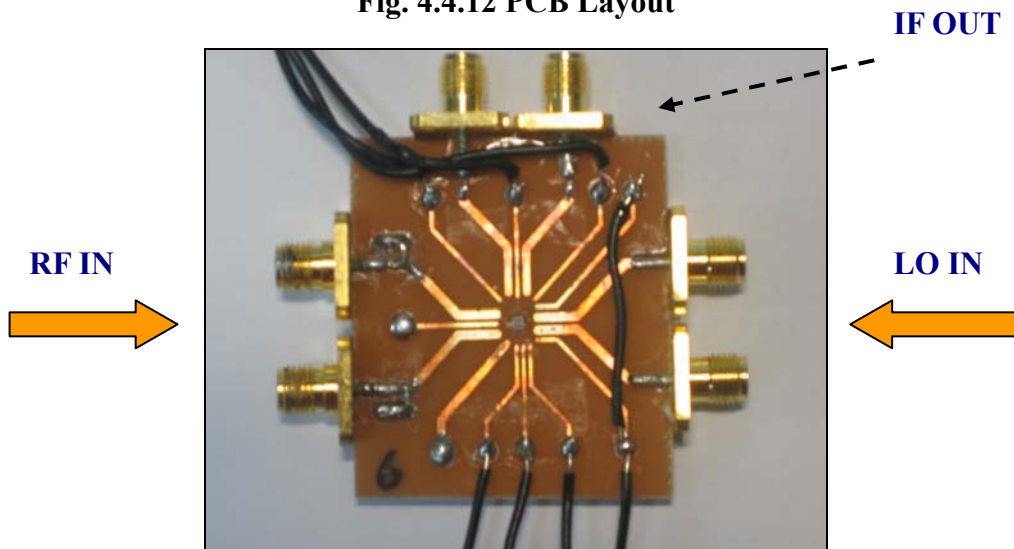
Photograph of Practical FR4 PCB circuit
